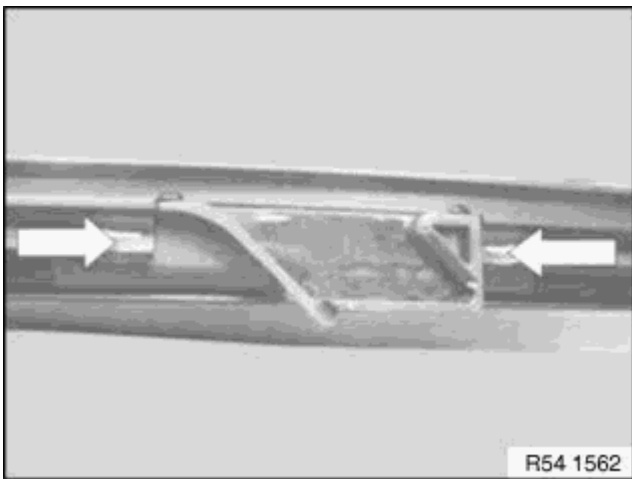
Screw Pressing Fixture By Means Of Reversible Ratchet Down To Stop
